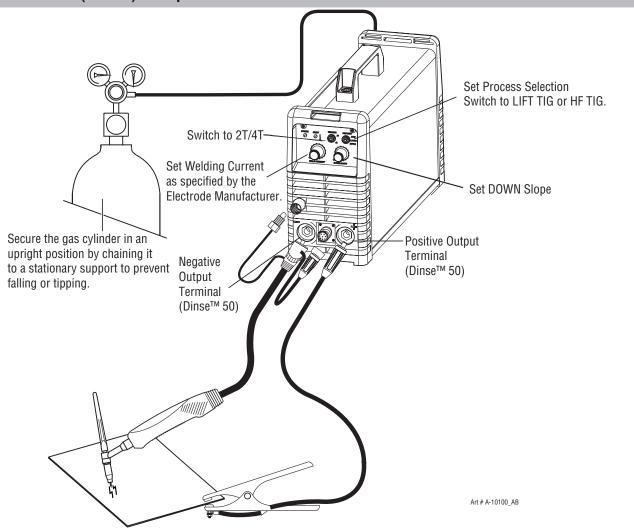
Setup for HF TIG (GTAW) Welding of ET 201i DC
